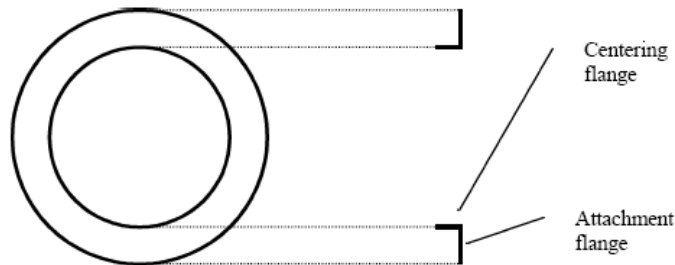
Schematic drawing of the attachment and centering flanges. Frontal and lateral views.
